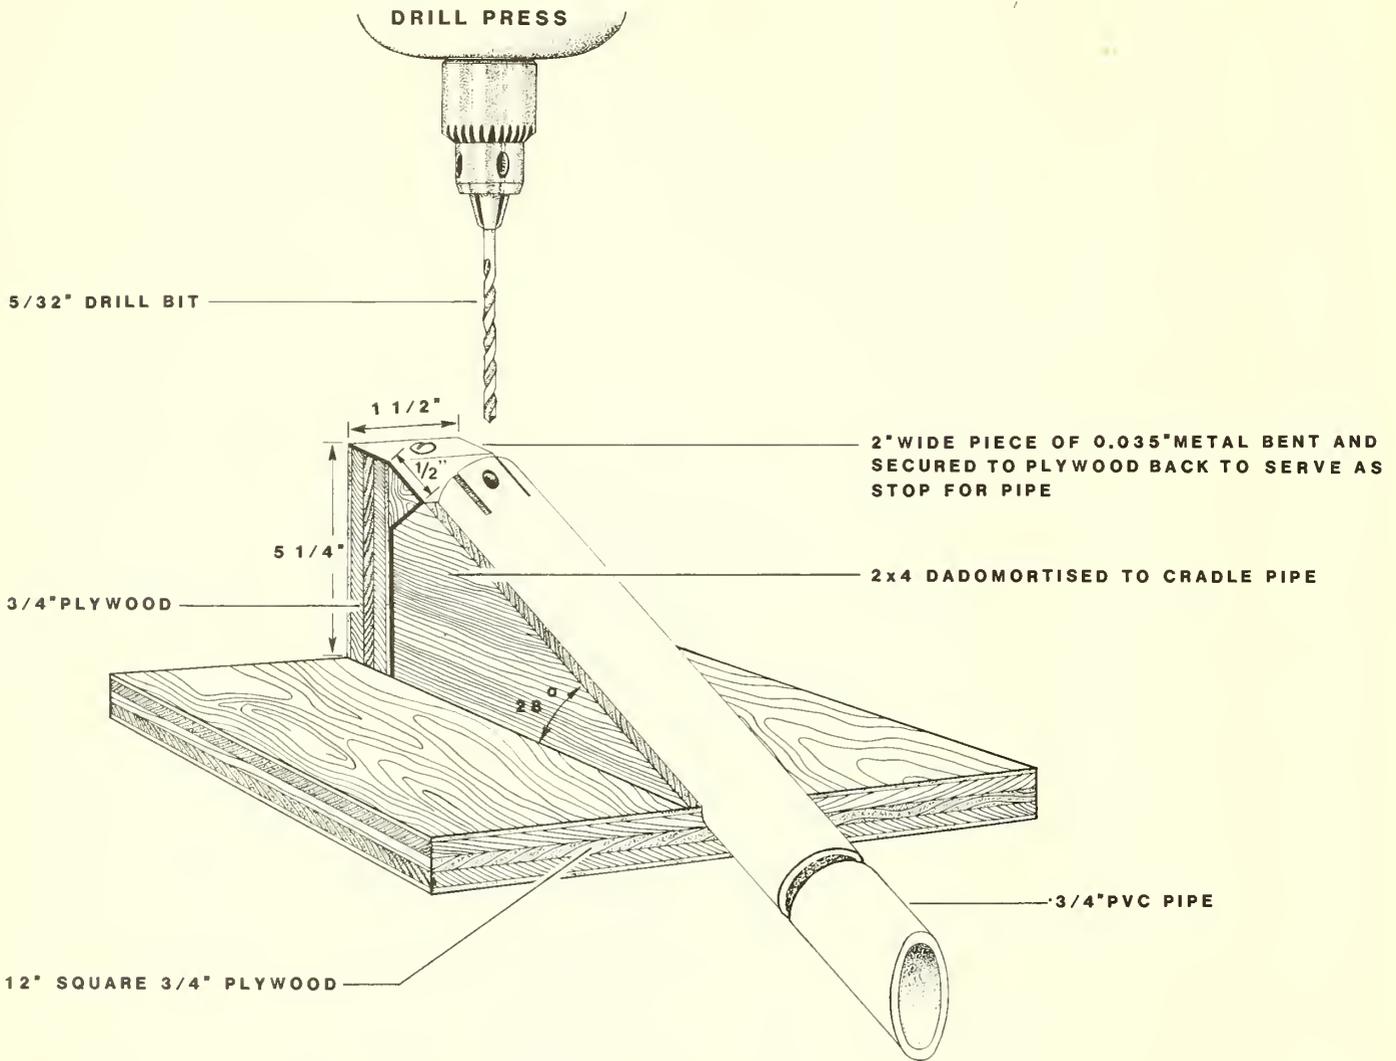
Jig and drill press setup for drilling hanger holes in top of pipe. Jig is precisely positioned and bolted to base of drill press so as the bit is lowered it enters upper surface of pipe exactly 3/16 inch from uppermost edge and exits lower surface of pipe 3/4 inch from uppermost edge. Pole lying in cradle has been drilled and is prepared for attachment of Pherocon II trap.
